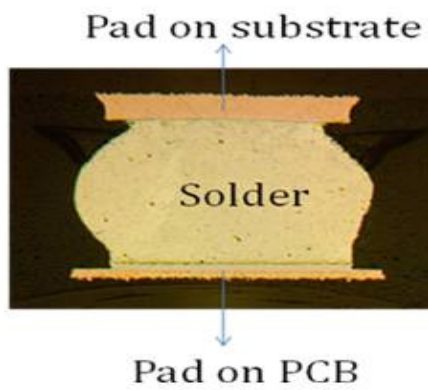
Solder joint (2nd level) between the PCB and the substrate
